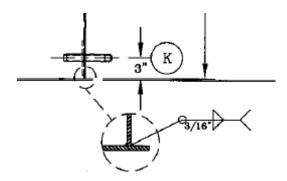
Weld between LAr tank cylindrical shell and flat head
